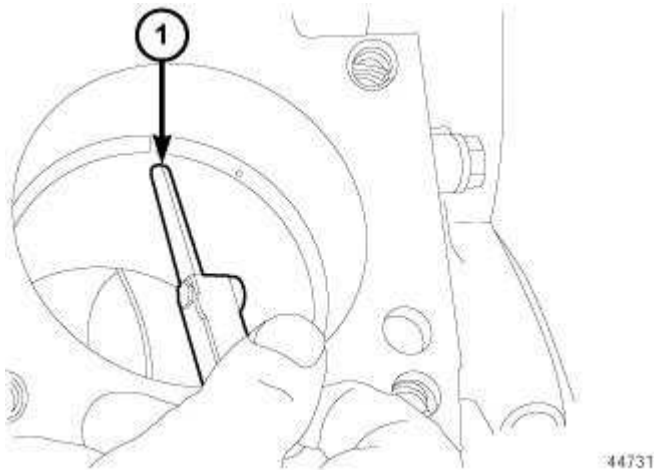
Checking Piston Ring End Gap Using Feeler Gauge
